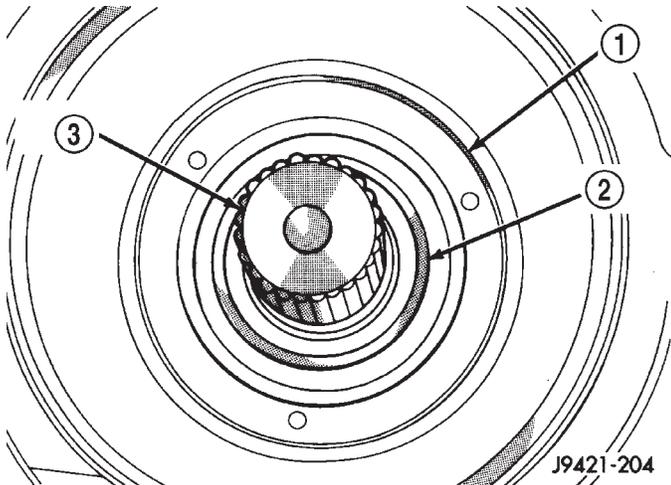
REAR BEARING SNAP RING - 4WD
